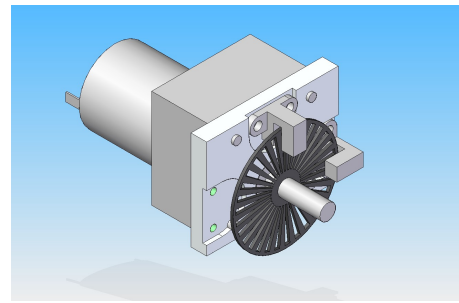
CAD model illustrating our incremental encoder attached to a motor. Our mechanical design is versatile enough to allow the use of two transmissive photointerrupters per motor, in case the implementation of a quadrature encoder is desired. However, the standard configuration in our prototype uses only one transmissive photointerrupter per motor, implementing incremental encoders that are not able to sense motor direction.
